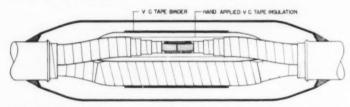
Straight joint for multi-conductor, belted-type, paper- or varnished-cambric-insulated, lead-covered cable.
